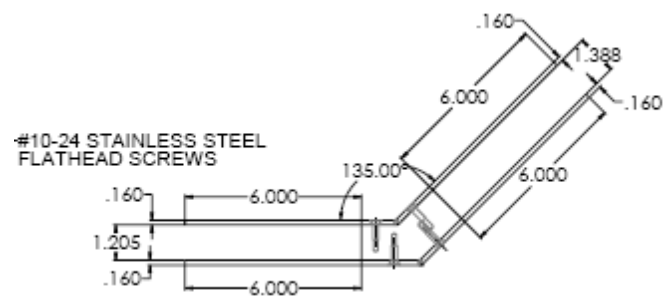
Angled sleeve joint specifications, dimensions in inches.
